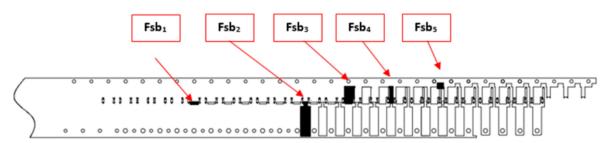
The layout of cutting force in the blanking process of progressive die design.
